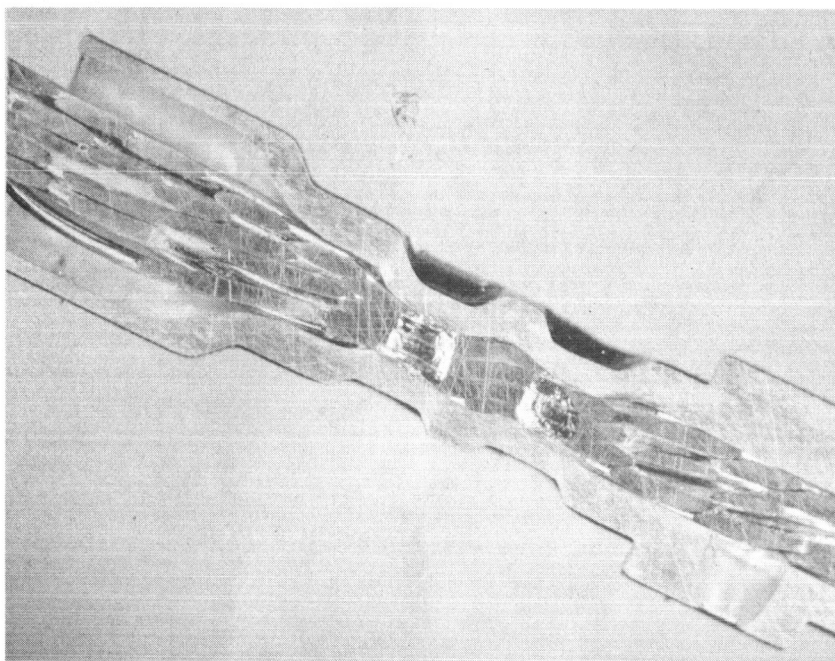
CESO-20-DO37-20 Section View of Crimped Contact
